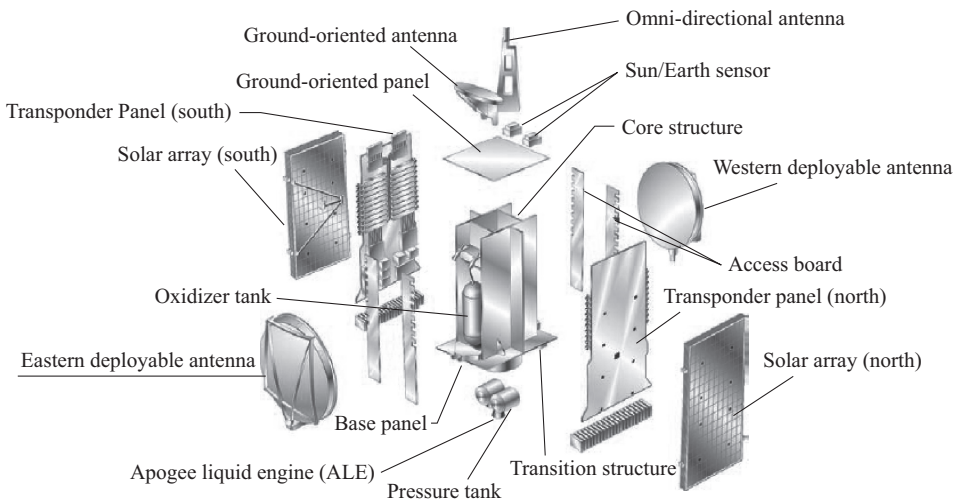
A2100AX platform with box-plate bearing structure.
